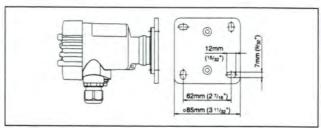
VEGADIS 61 for wall mounting, bottom view of mounting plate.
